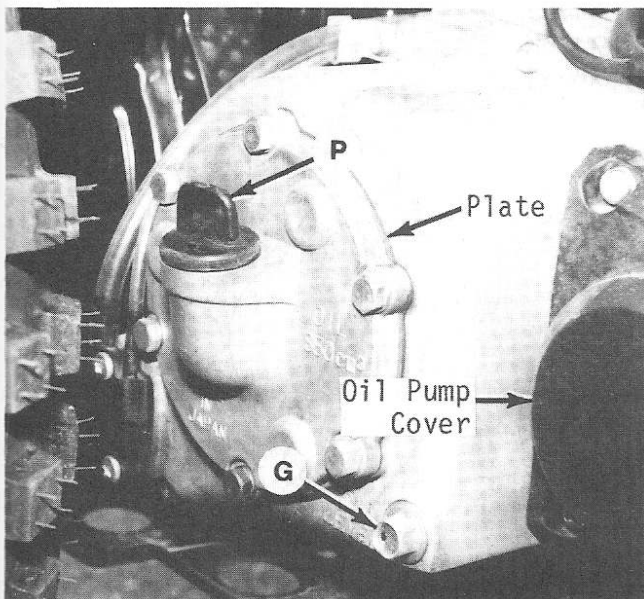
Remove plug (P) and pour oil through opening to fill transmission. Oil should reach level of plug (G) hole.
